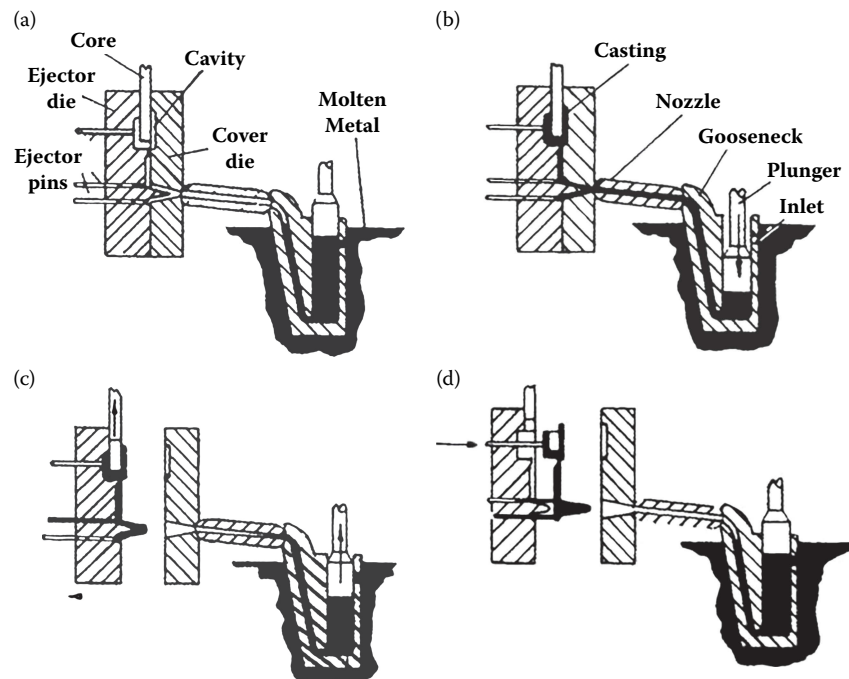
Operating sequence for the hot-chamber, die-casting process. (a) Die is closed and hot chamber (i.e., gooseneck) is filled with molten metal. (b) Plunger pushes molten metal through gooseneck and nozzle and into the die cavity. Metal is held under pressure until it solidifies. (c) Die opens and cores, if any, retract. Casting stays in ejector die. Plunger returns, pulling molten metal back through nozzle and gooseneck. (d) Ejector pins push casting out of ejector die. As plunger uncovers filling hole, molten metal flows through inlet to refill gooseneck
